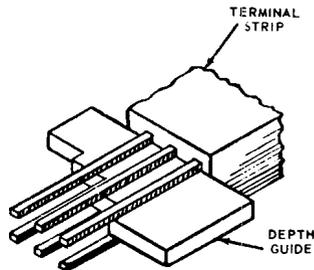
Method of Using Depth Guide for Soldered Connections on Terminal Strips
